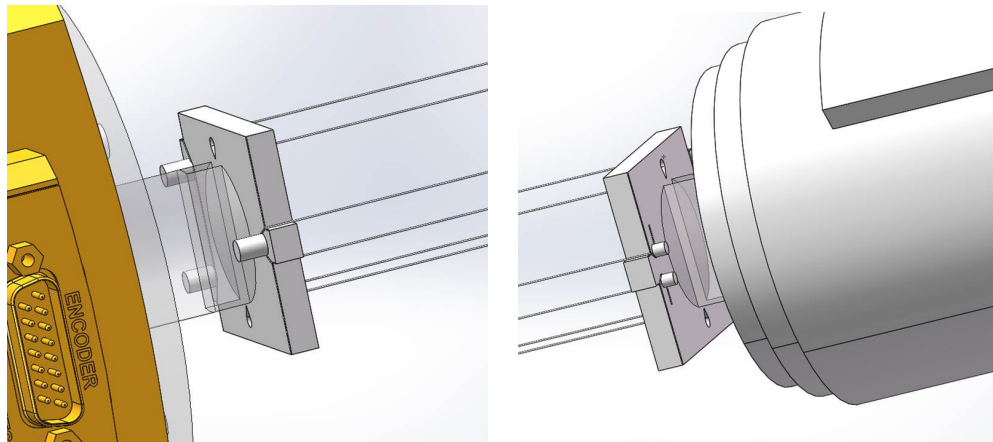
Zoom in of coil fixture and wire at far away side (Left) and slip ring side (Right).
